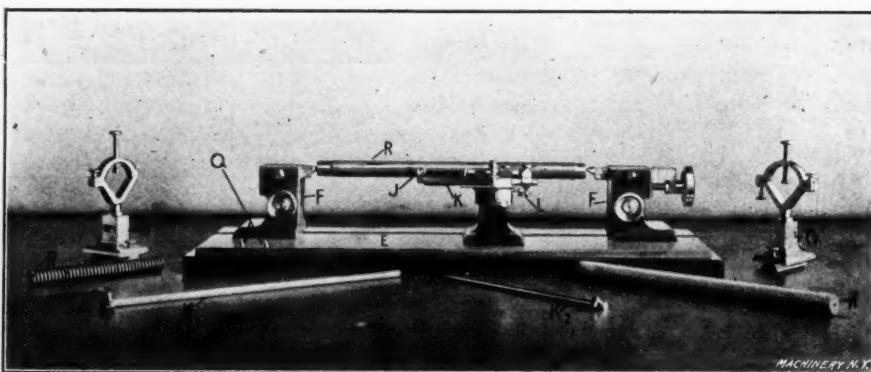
Indicator shown in Fig. 21 in Use testing Lead of Long Screw
